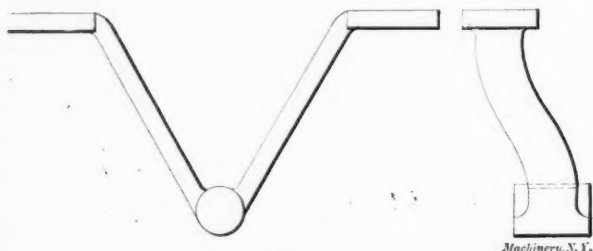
Example of Forging Work which can be facilitated by using a Surface Plate.
